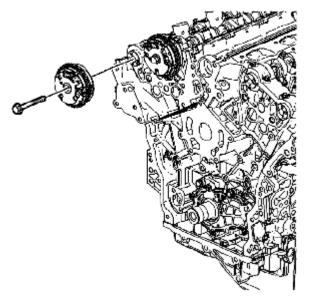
Identifying Body Of Camshaft Position Actuator For "EX" Marking Courtesy of SUZUKI OF AMERICA CORP.
